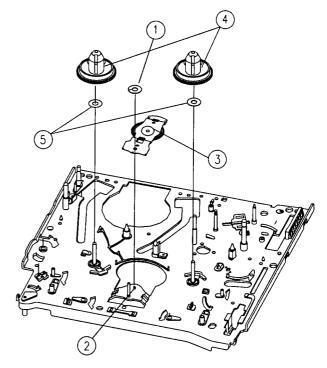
IDLER PLATE TOTAL ASS'Y & S/T REEL TABLES REMOVAL
